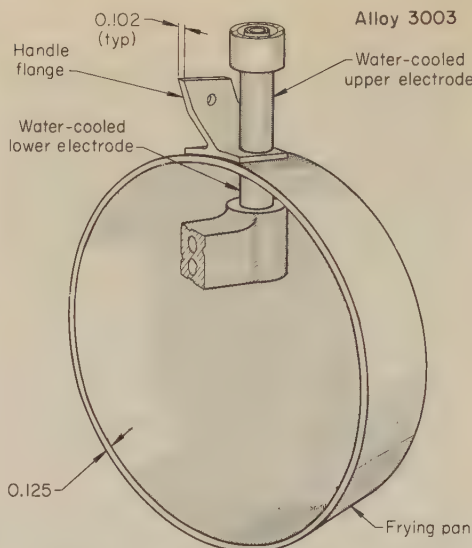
Spot welding of a handle flange to an aluminum alloy frying pan
